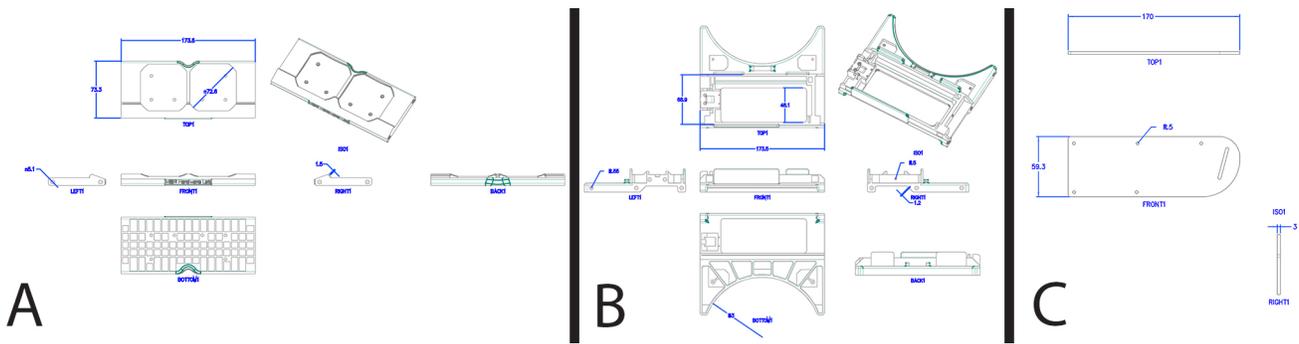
The mechanical design of the Reality Masher. (A) Bottom view, (B) Top view, (C) Side panels
